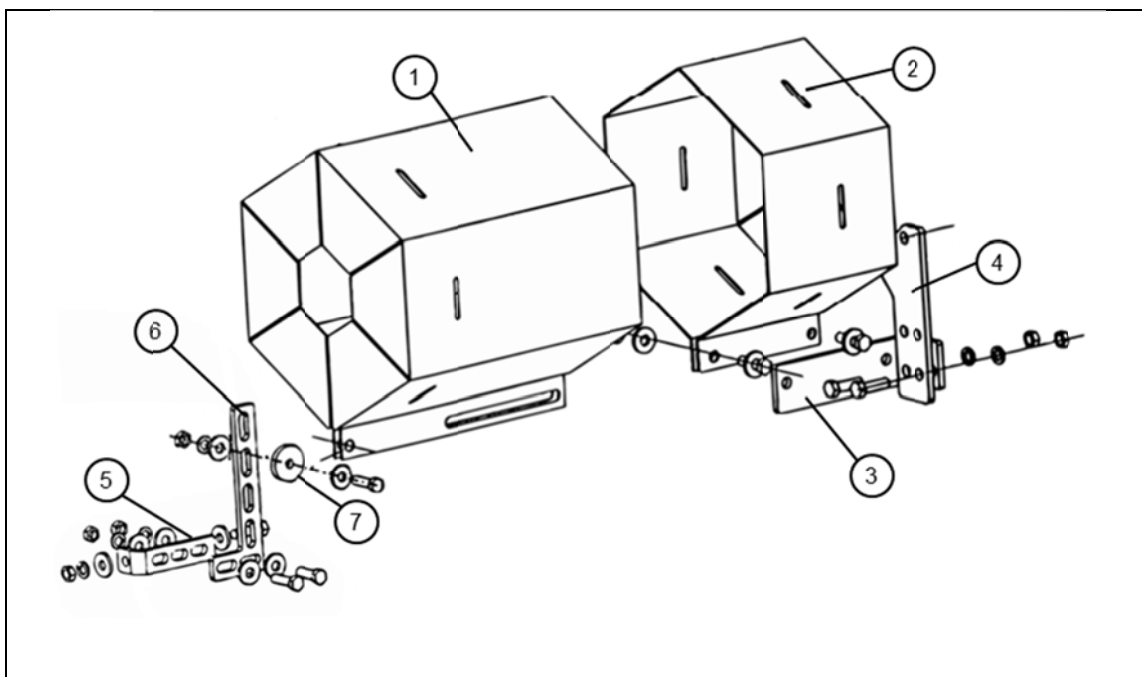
Coupler Guard Exploded View for typical Motor Driven HSC Fire pump
